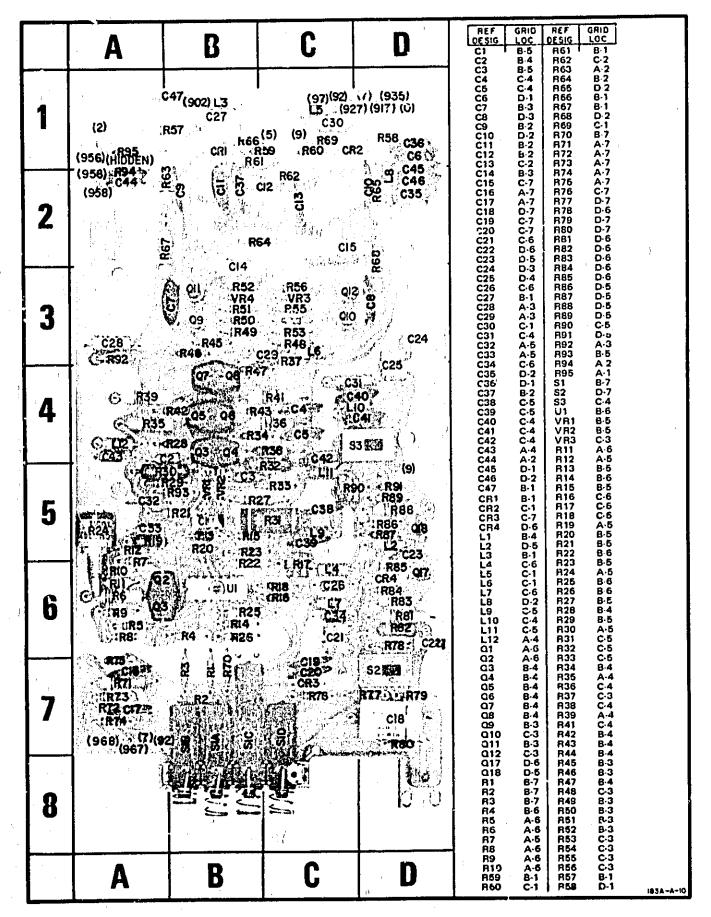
Component Locations, Horizontal Amplifier Board A11A1
